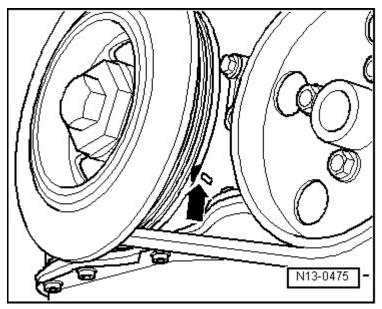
Identifying Crankshaft At Vibration Damper Securing Bolt In Engine At TDC Cyl. 1 Courtesy of AUDI OF AMERICA, LLC
